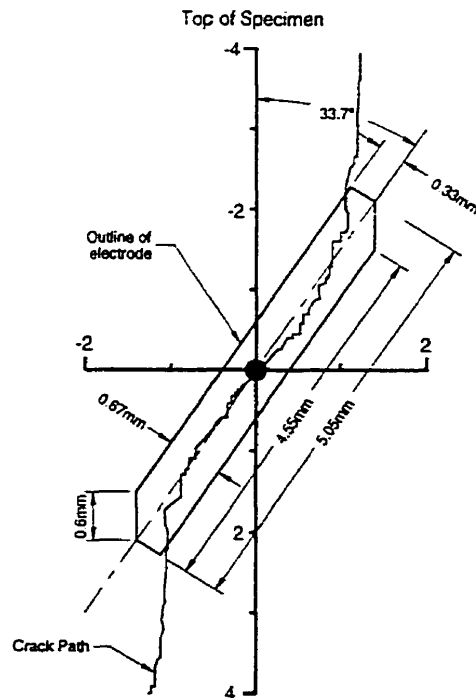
Example of precrack crack growth removal. All dimensions are in mm.
